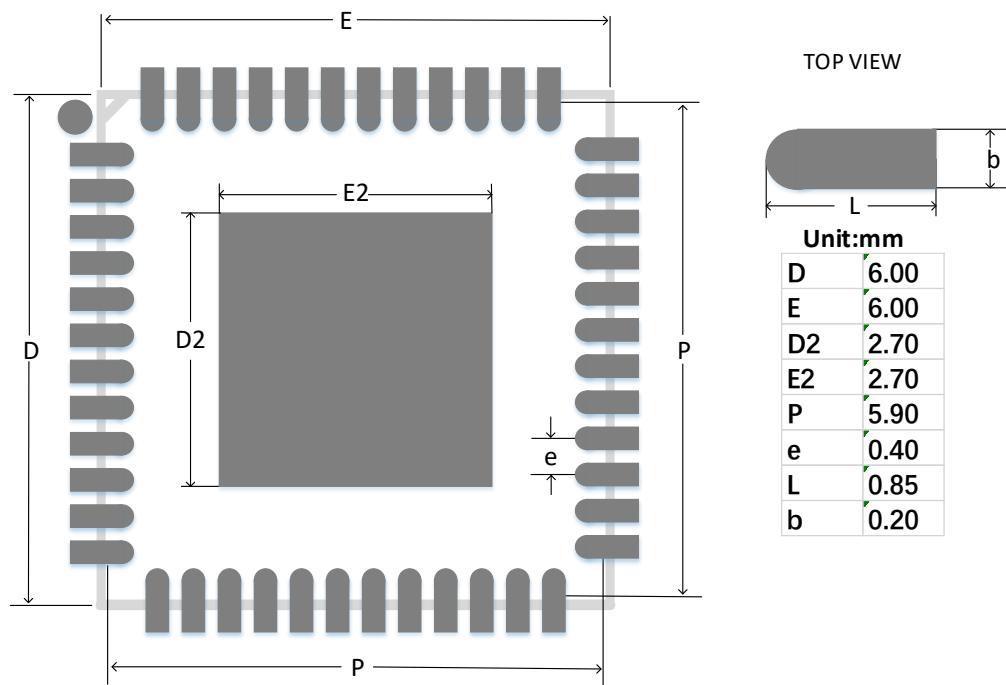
Recommended PCB Layout QN48/QN48F(GW1N-9)
